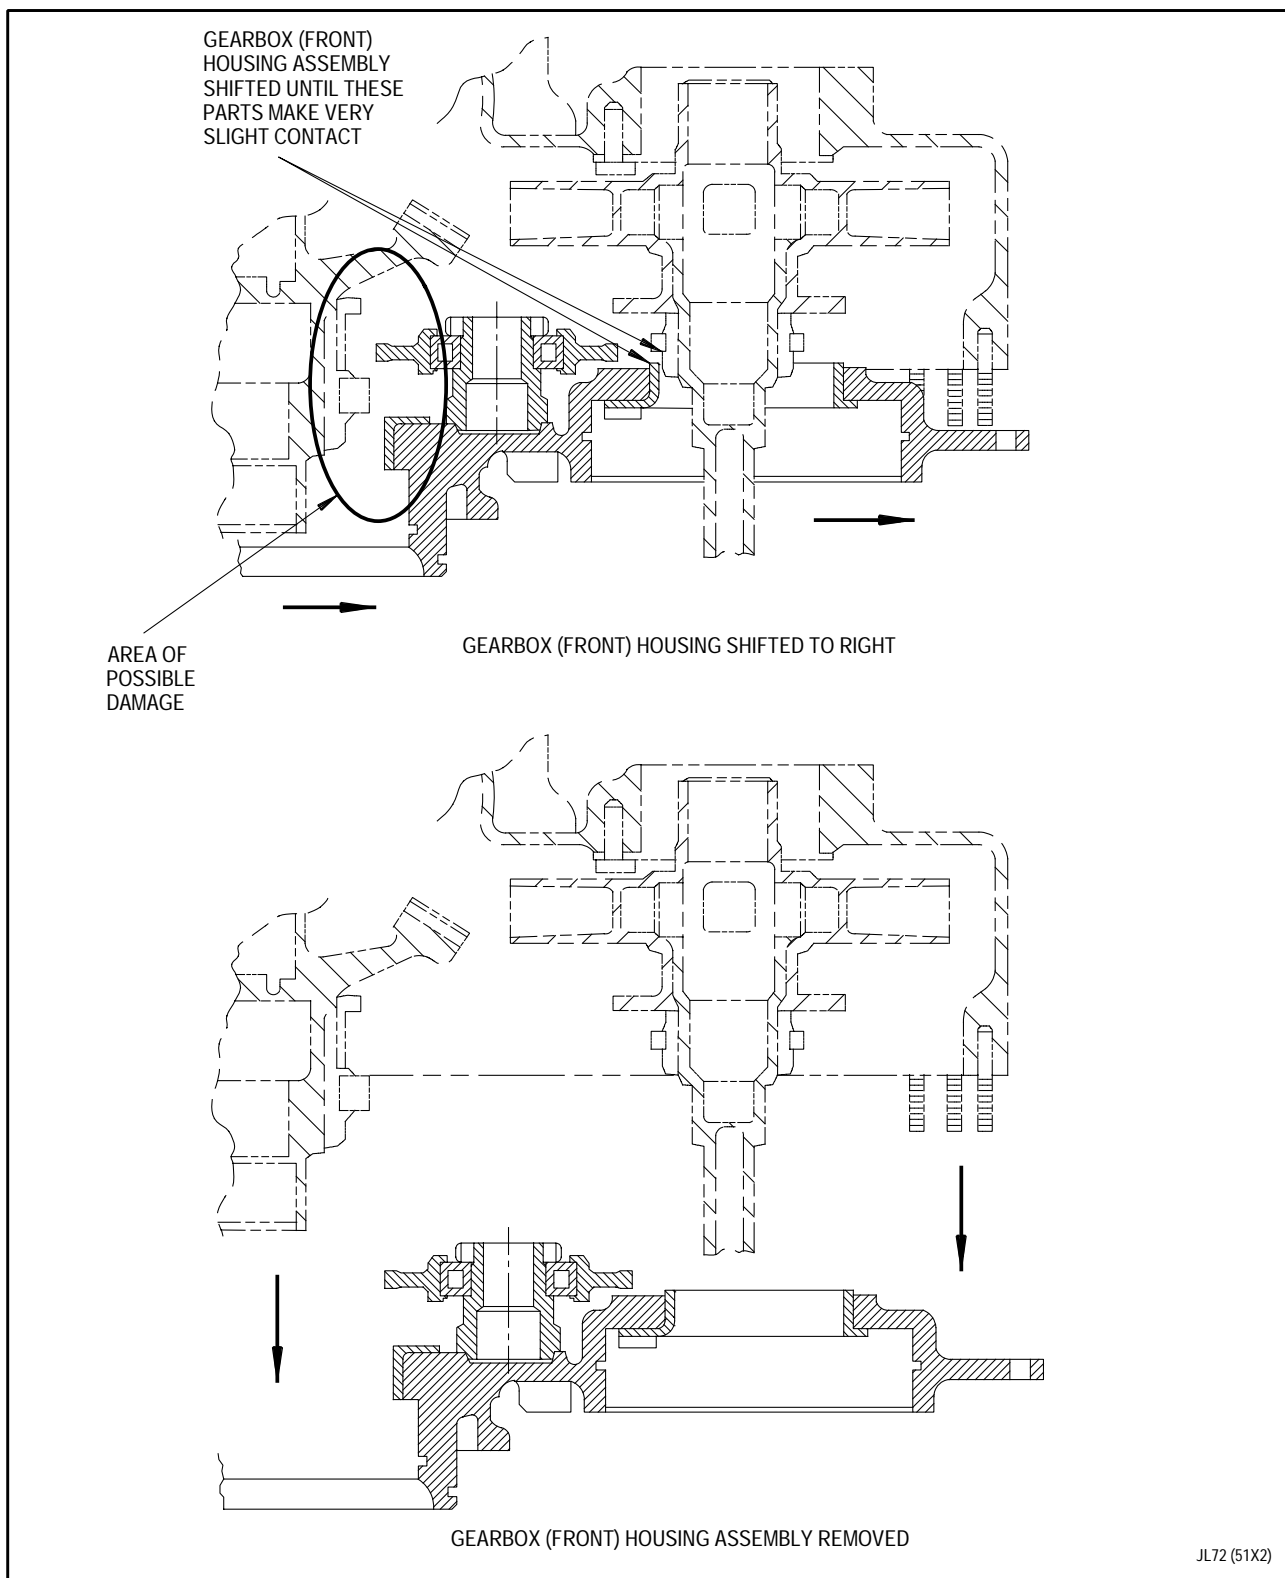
Removal of Gearbox (Front) Housing from Gearbox (Rear) Housing (Sheet 2 of 2)
